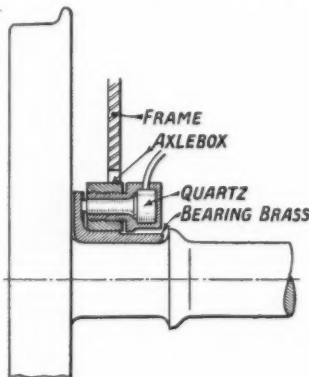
Location of piezo-electric device between axlebox and bearing brass, for measurement of lateral forces between wheel and rail
